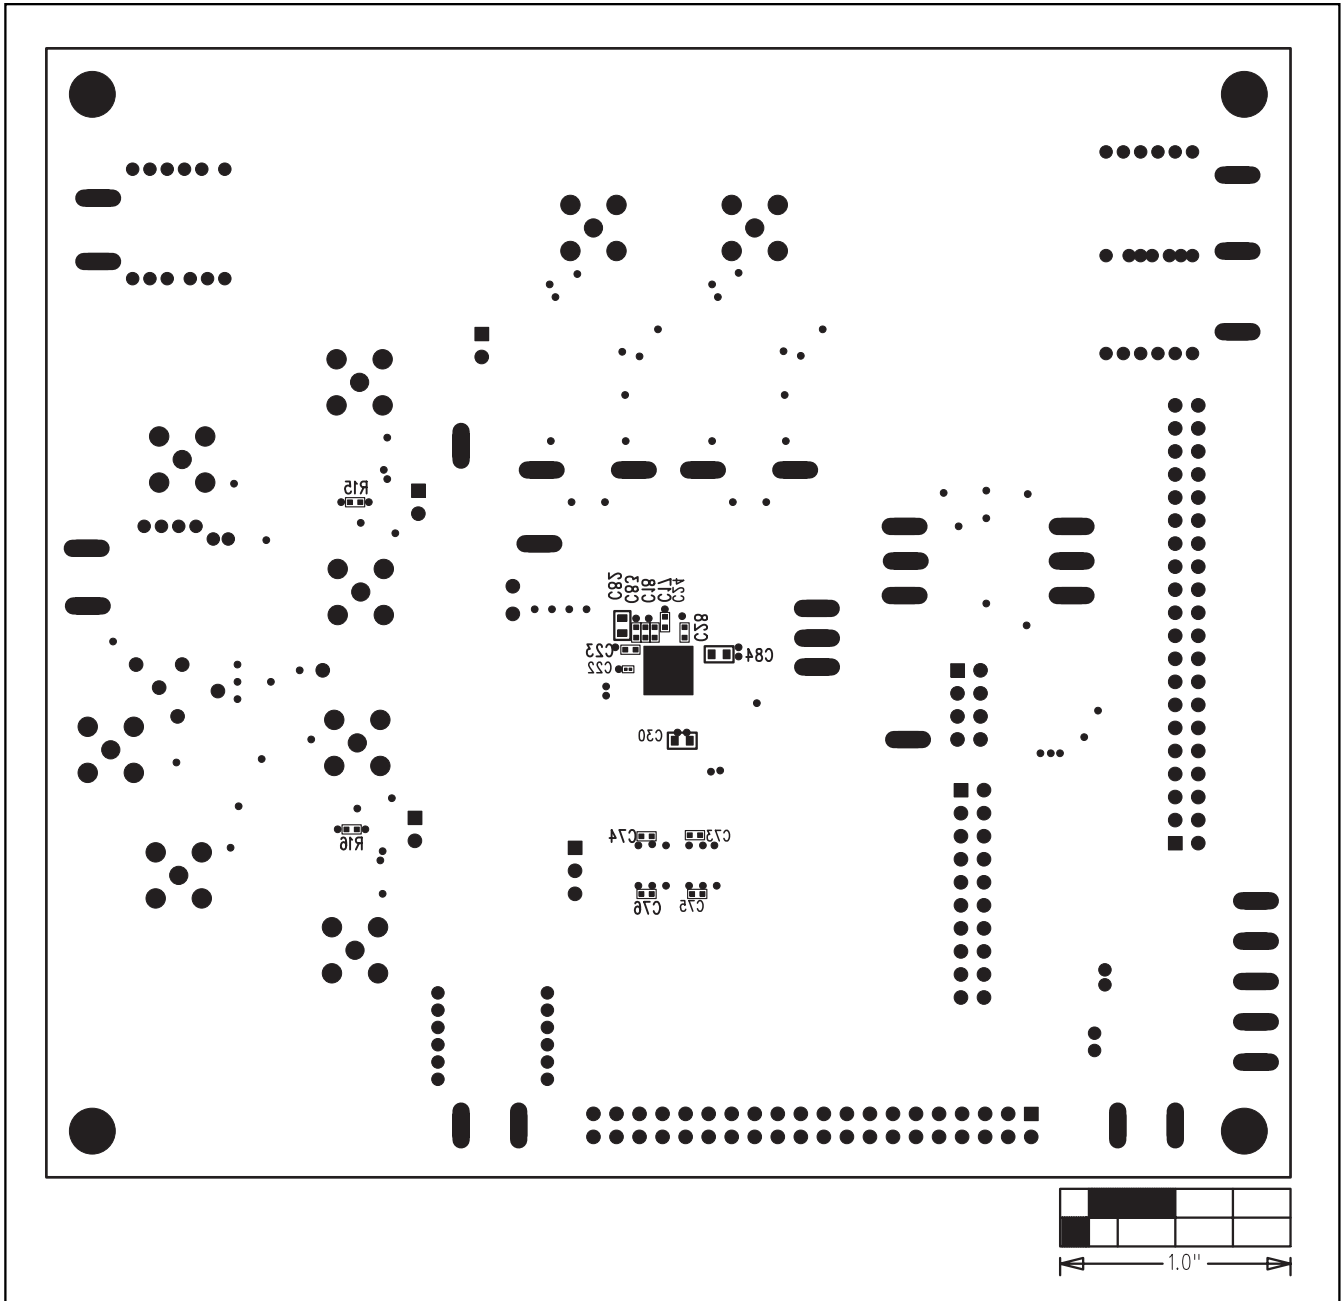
MAX19710-MAX19713 EV Kit Component Placement Guide—Solder Side
